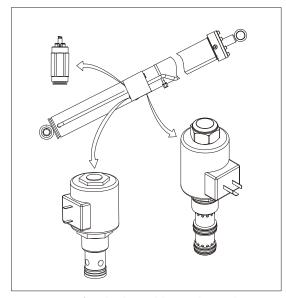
Lift Cylinder Holding Valve and Fitting Removal
